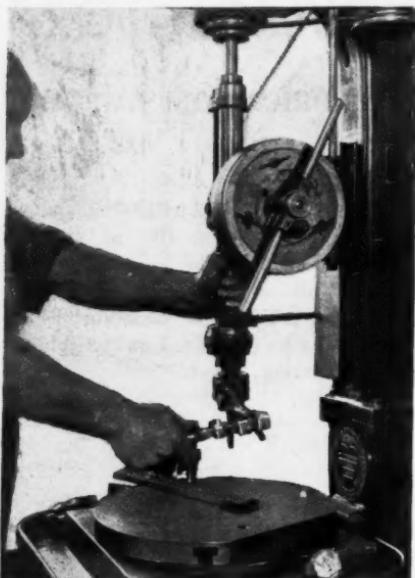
Using a wrench to tighten the Jaws will result in damage to other parts of the chuck and may ruin it beyond repair.
